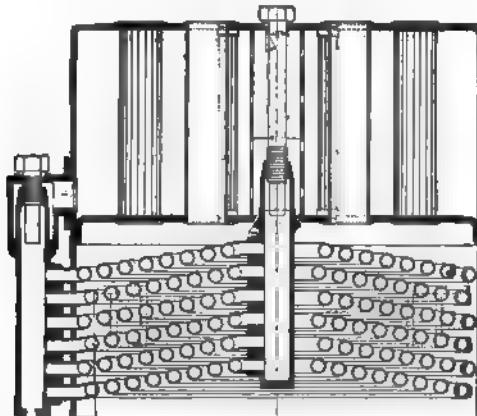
The Geneva Carriage Boiler. This boiler consists of several coils of tubing connected at inner and outer extremities to headers, as shown. The water and steam chamber above is constructed like an ordinary flue boiler.
